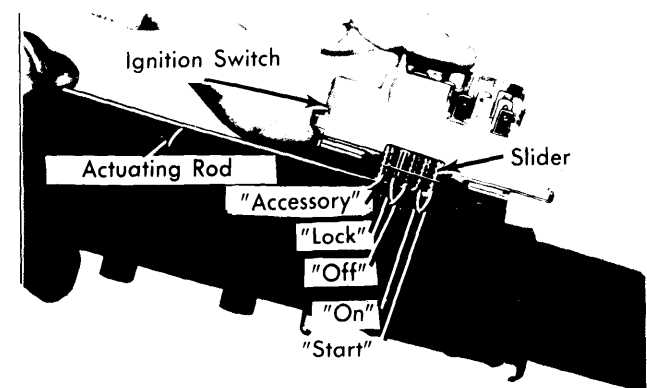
Rod Actuated Ignition Switch Common to All Models
